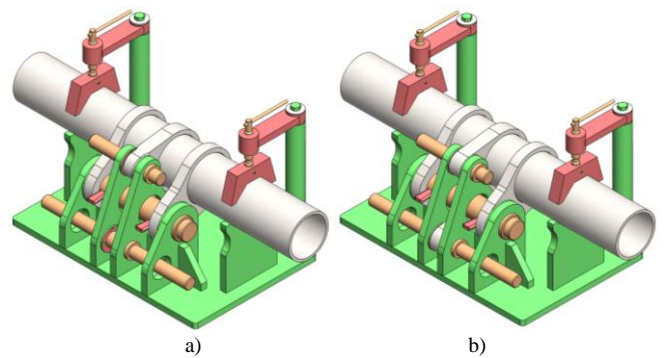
Fixture for assembling left and right tubes for grapple buckets.
